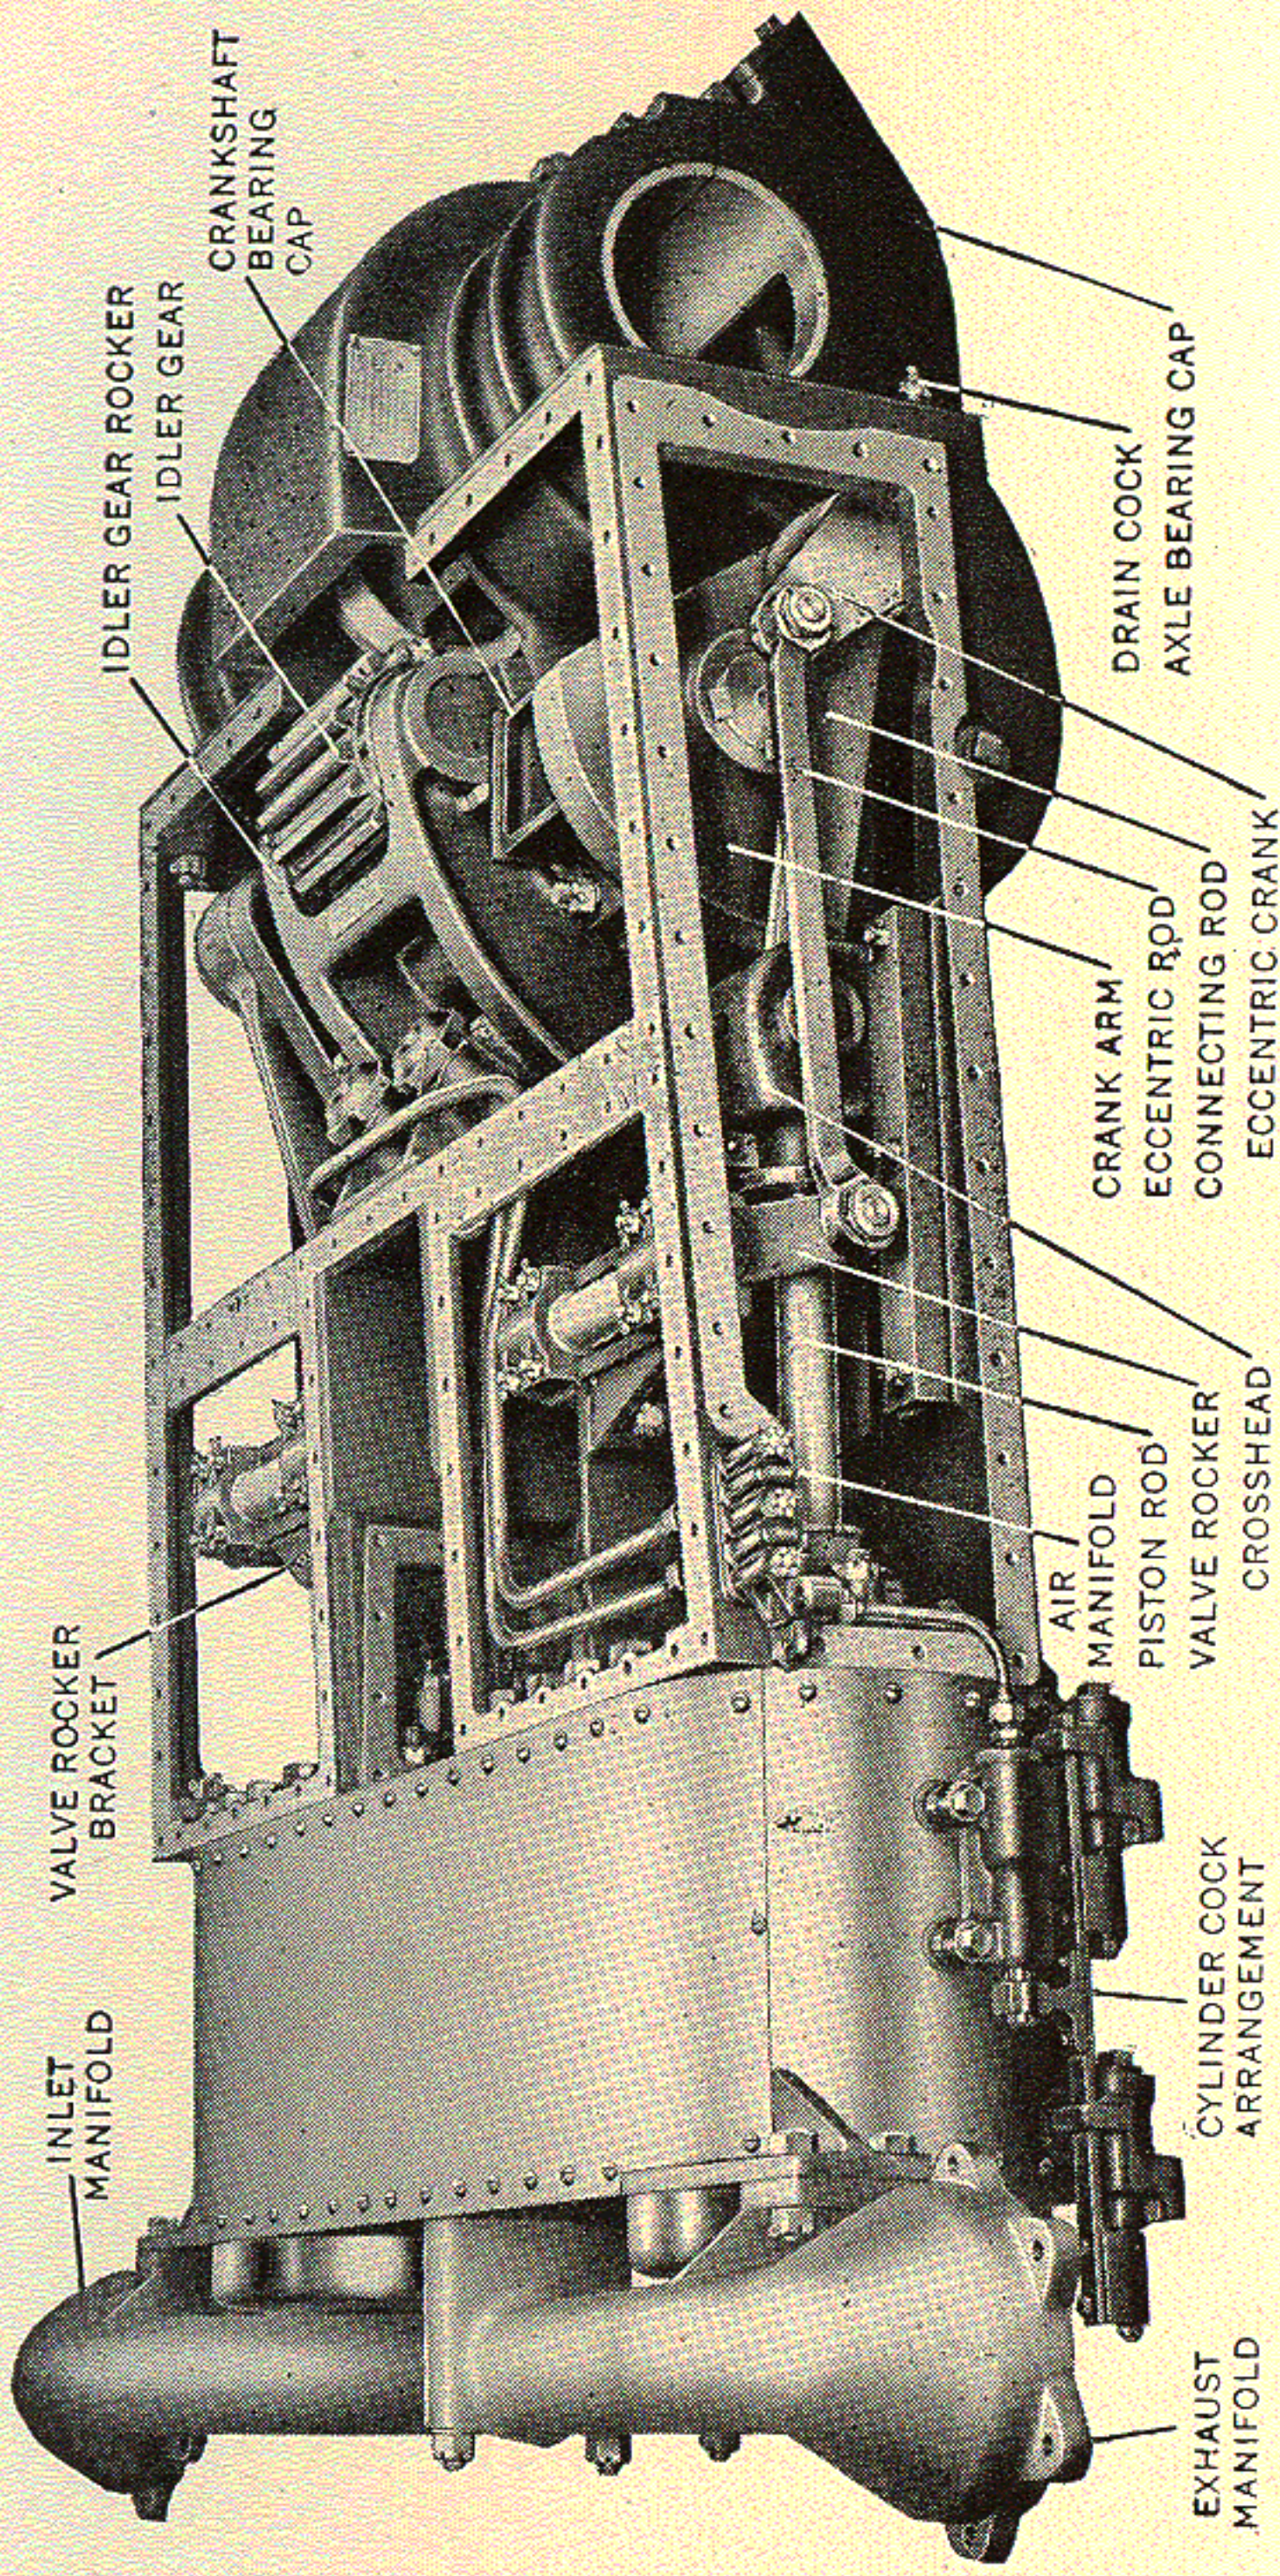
Type C-2 Booster Engine; Cover Plates and Casing Top Removed
